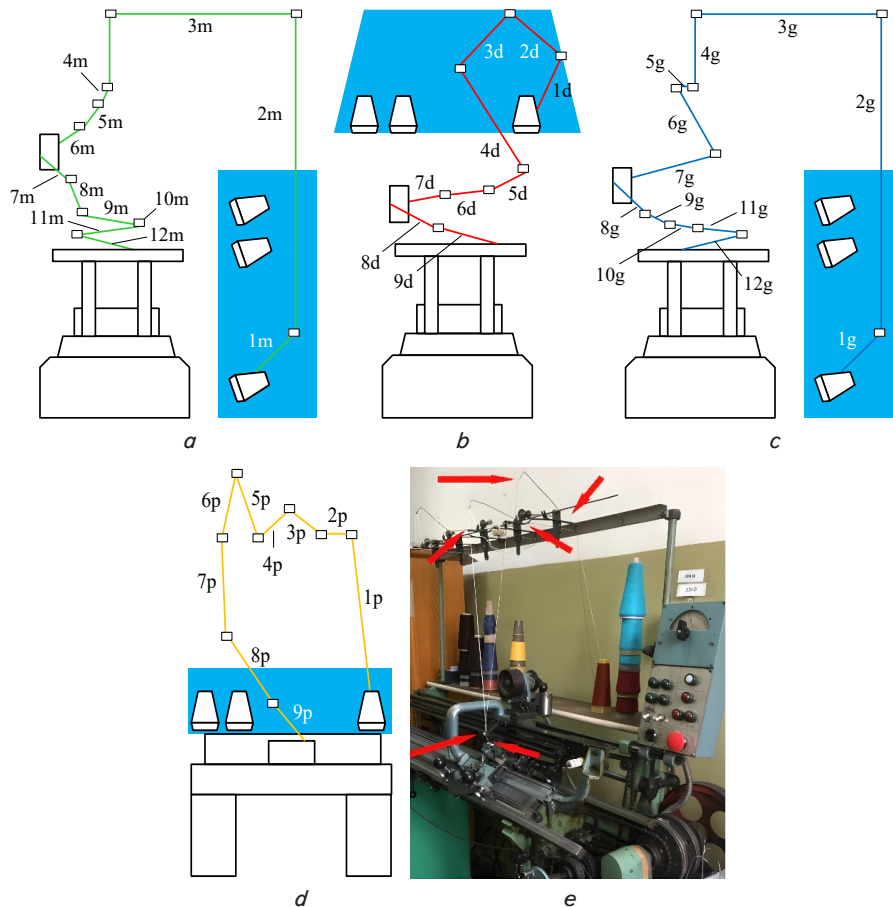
Thread filling schemes on knitting machines: *a* – circular knitting machine Mayer; *b* – circular knitting machine DL; *c* – Pailung circular knitting machine; *d* – flat knitting machine; *e* – a general view of a flat knitting machine
